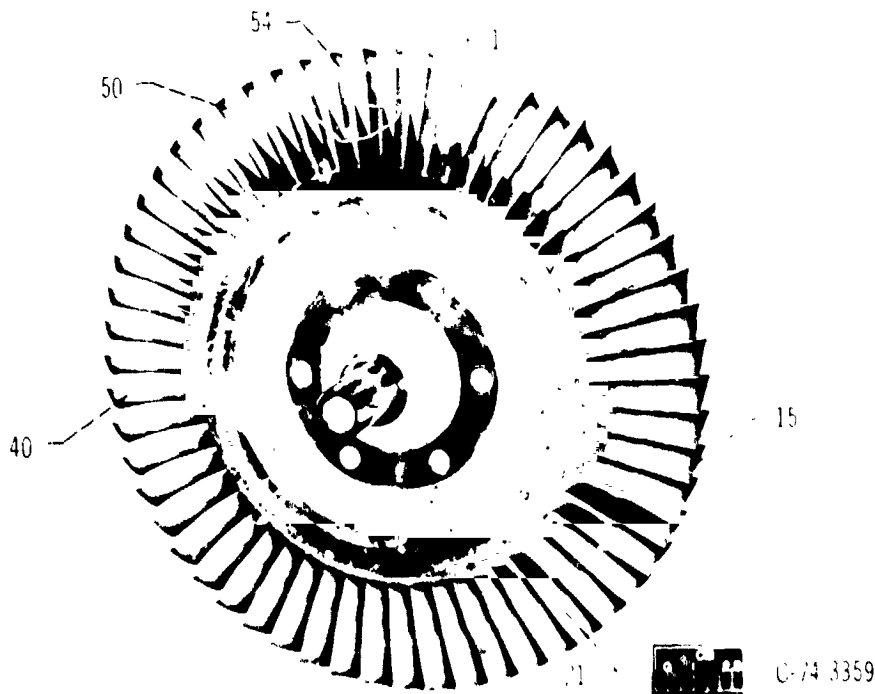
Turbine rotor showing location of failed blade and those with cracks in the trailing edge
